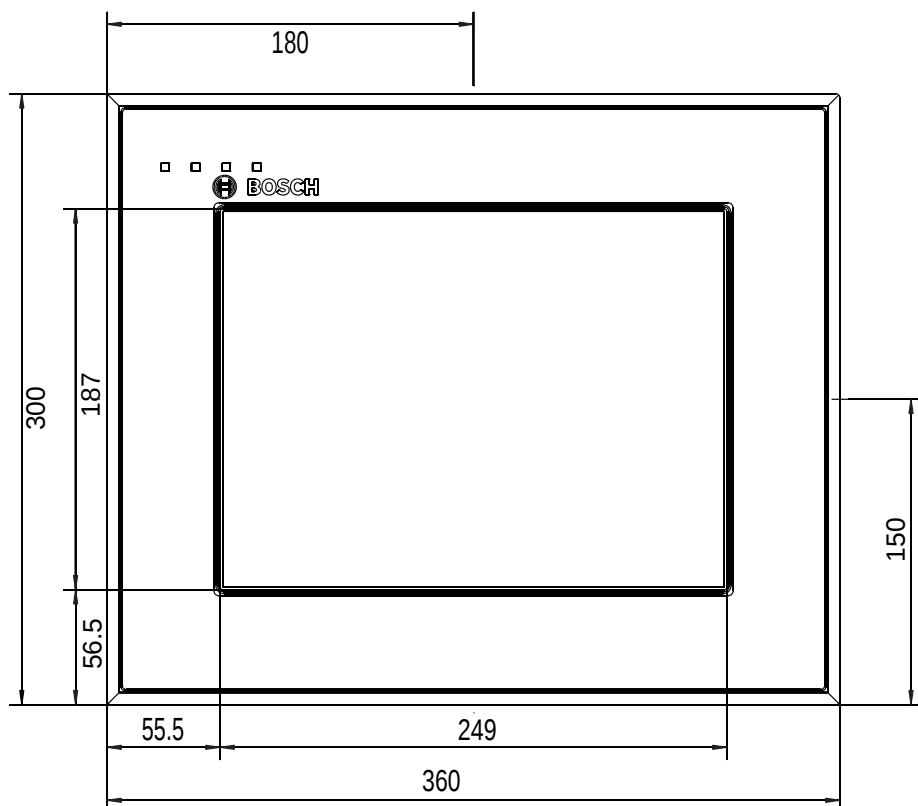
Dimensions: Front panel of the VDP 16.3AK
